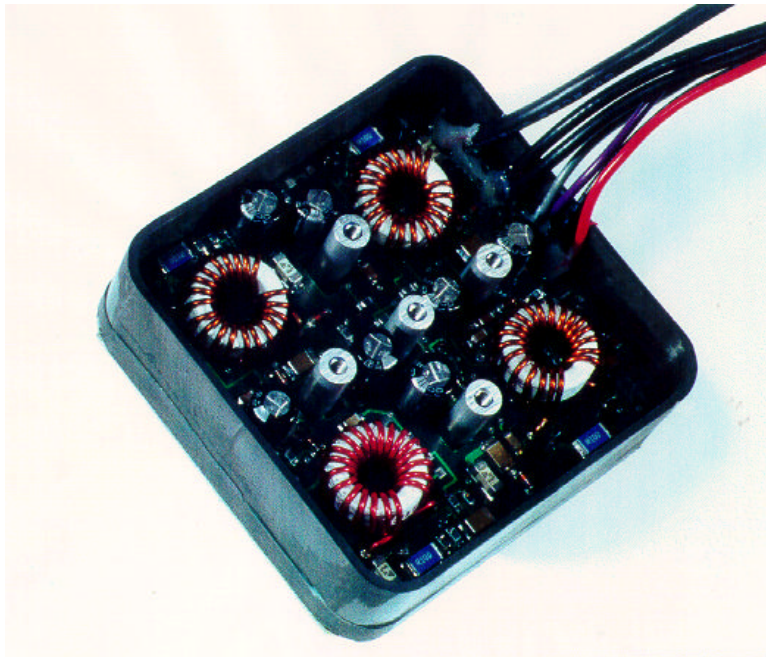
Bottom View of a Surface Mounted Switching Amplifier
